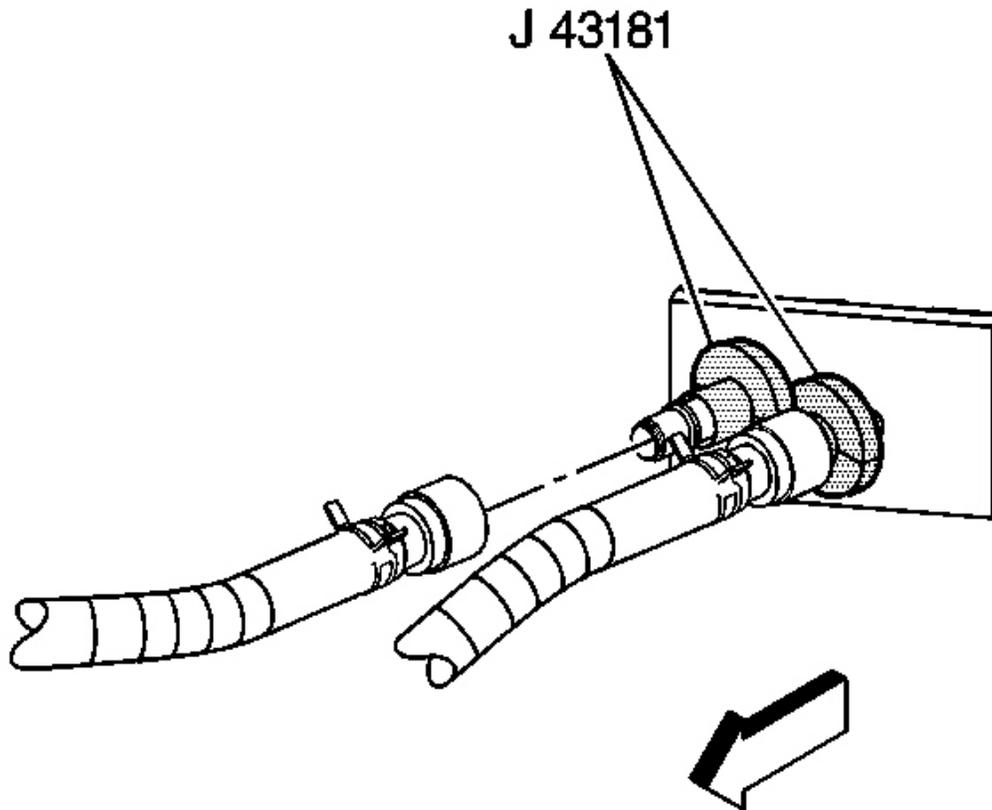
Identifying Heater Hose To Heater Core Fittings
